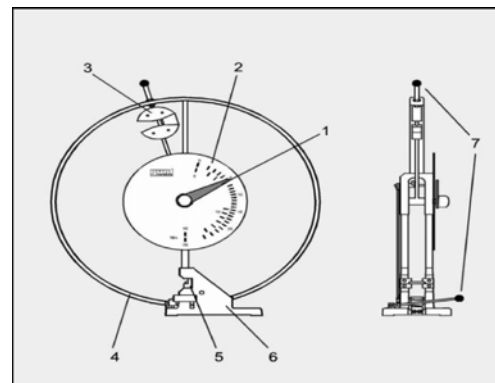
Device design: 1 needle; 2 measurement scale; 3 Hammer with removable additional weight; 4 protection ring; 5 sample lodging; 6 base; 7 trigger two hands and brake
